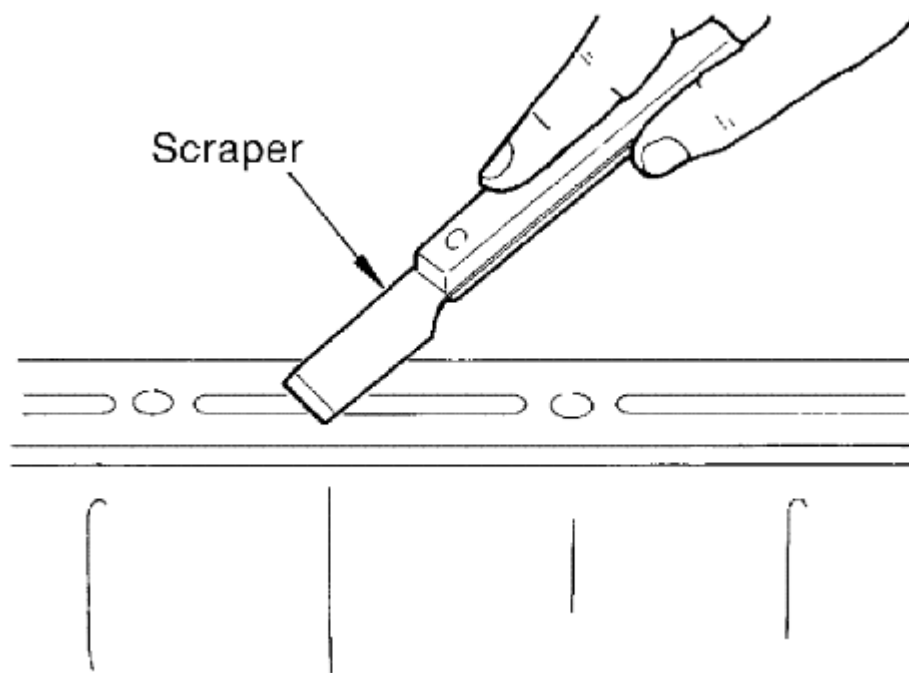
Removing Liquid Gasket Adhering To Gasket Application Surface And Mating Surface Using Suitable Tool
